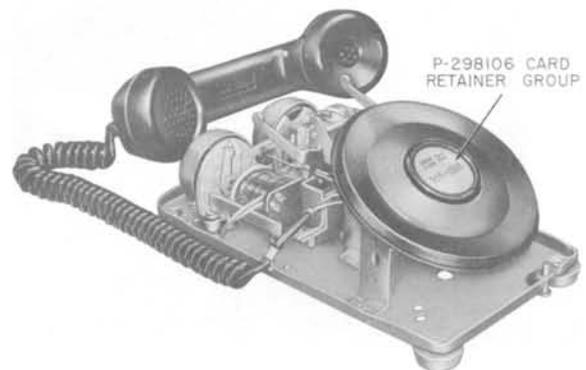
95C Apparatus Blank on Dial Mounting Bracket in 500- or 501-Type Telephone Set
